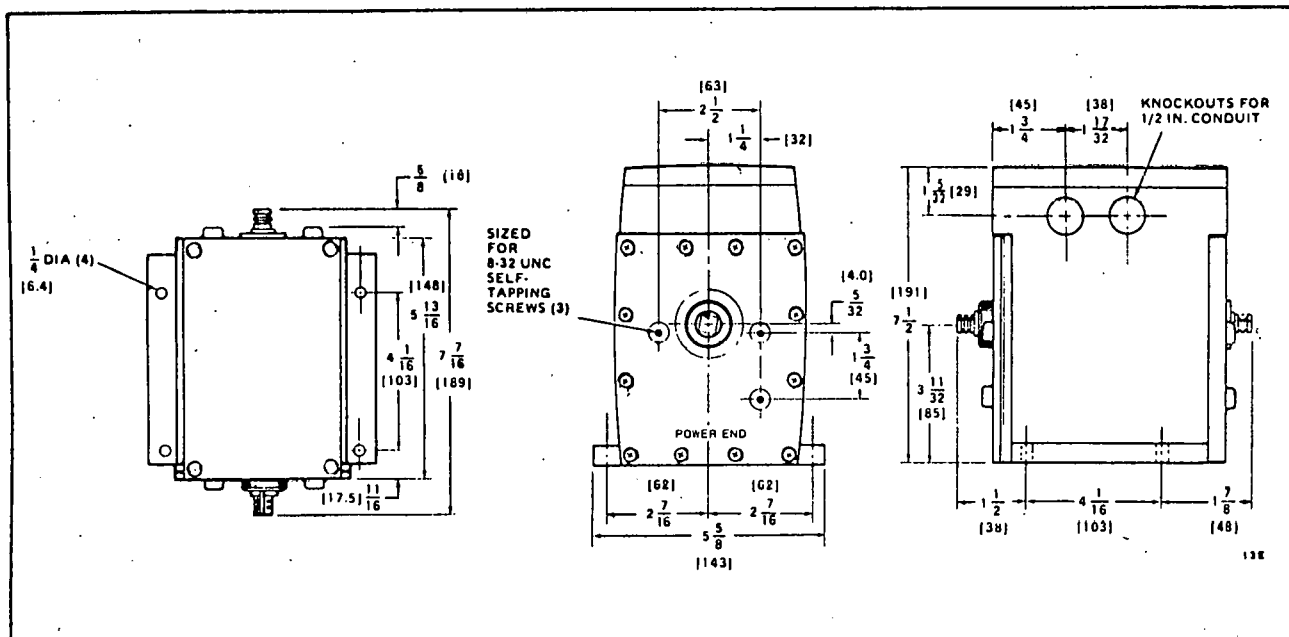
DIMENSIONS, IN INCHES [IN MILLIMETRES], OF M944 MODUTROL MOTOR.
